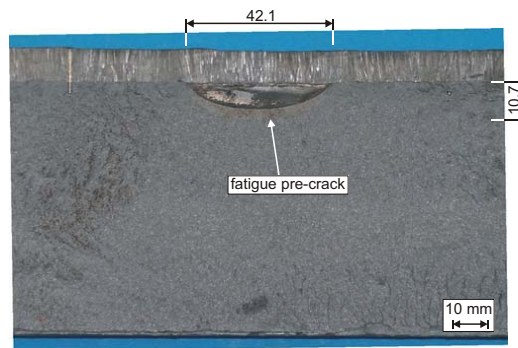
Fracture surface of the specimen with sub-clad crack.
